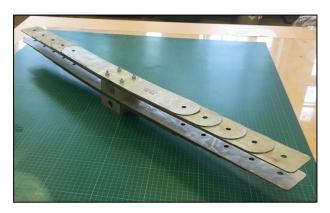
Gyroplane rotor blades connector prepared in hybrid technology
